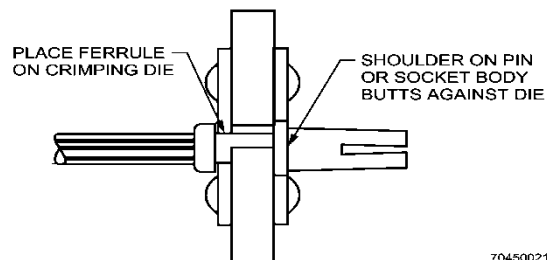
Contact-Ferrule Assembly in Crimping Die of AMP 220066-1 Ferrule Crimping Tool Ready for Crimping
